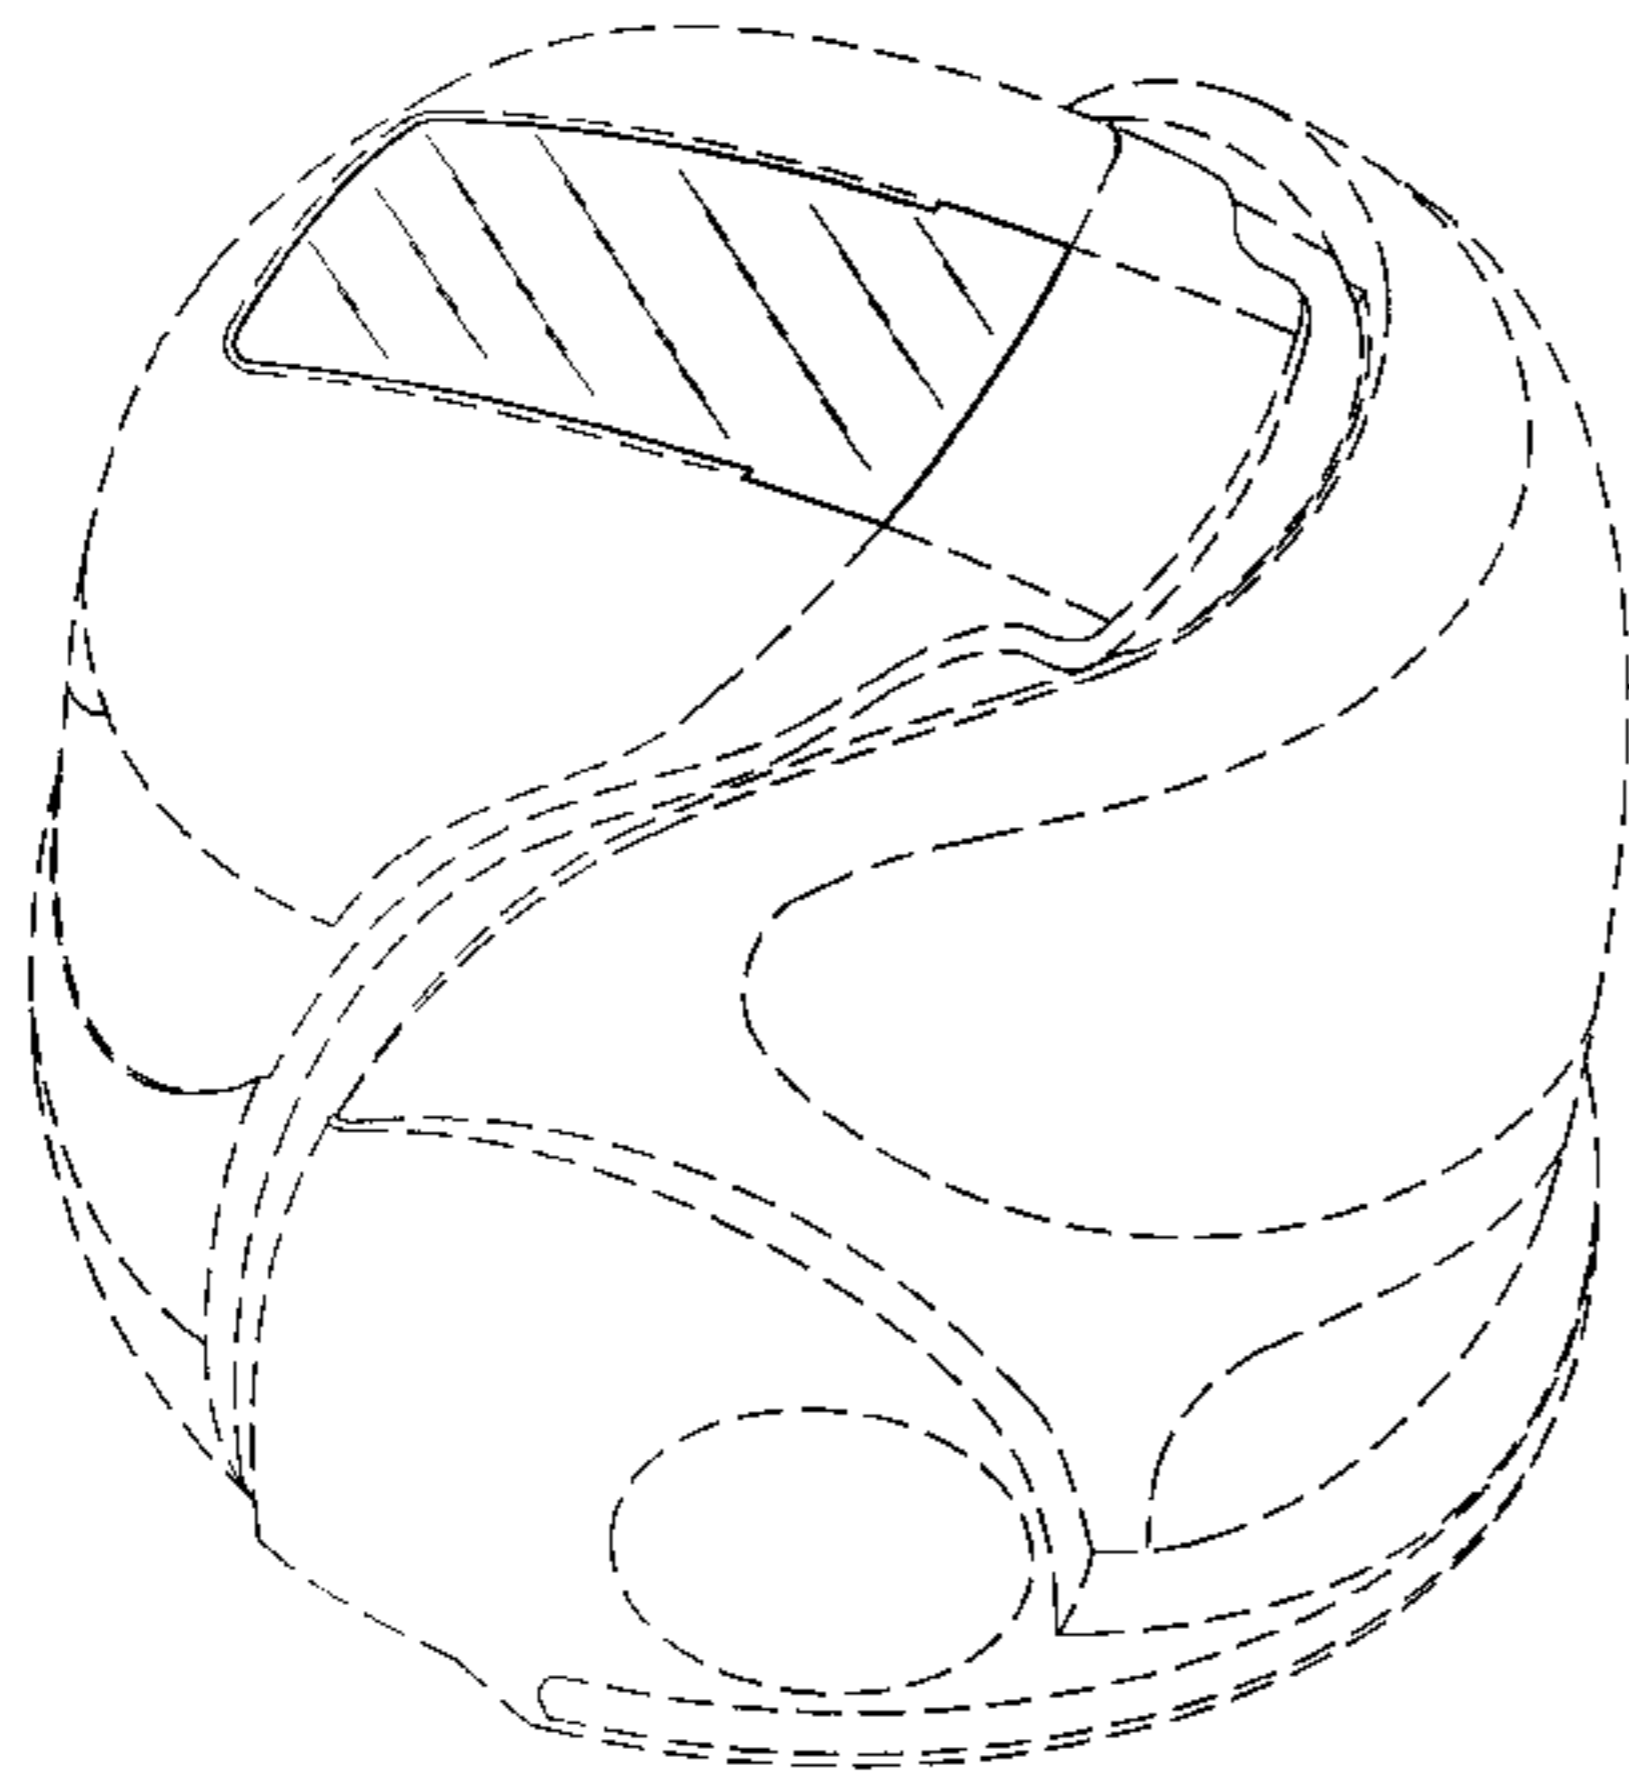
is a front right perspective view of a dust bin viewing window for a robotic vacuum cleaner showing our new design;
